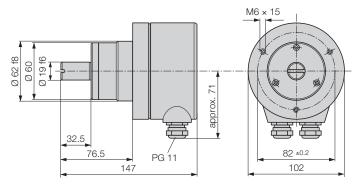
KINAX WT 707 with screw terminals and cable glands.
